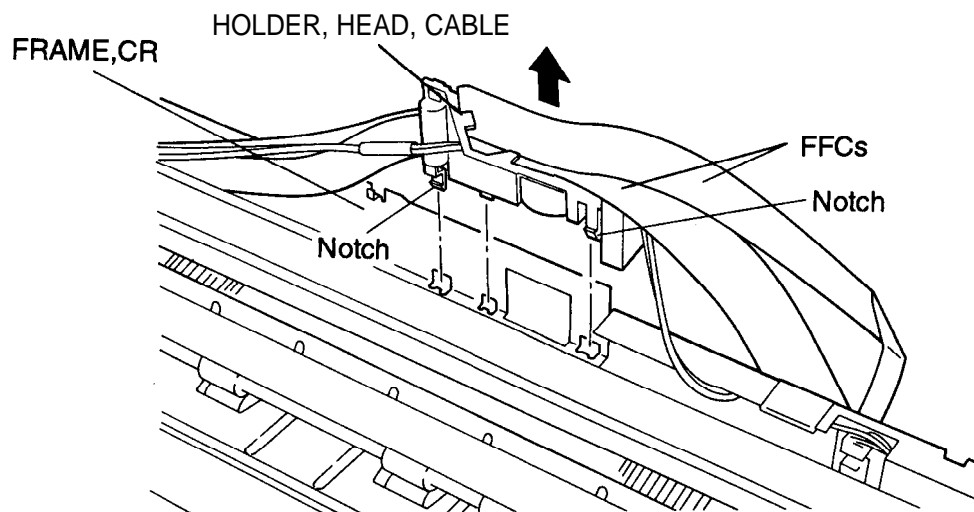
Removing the HOLDER,HEAD,CABLE
